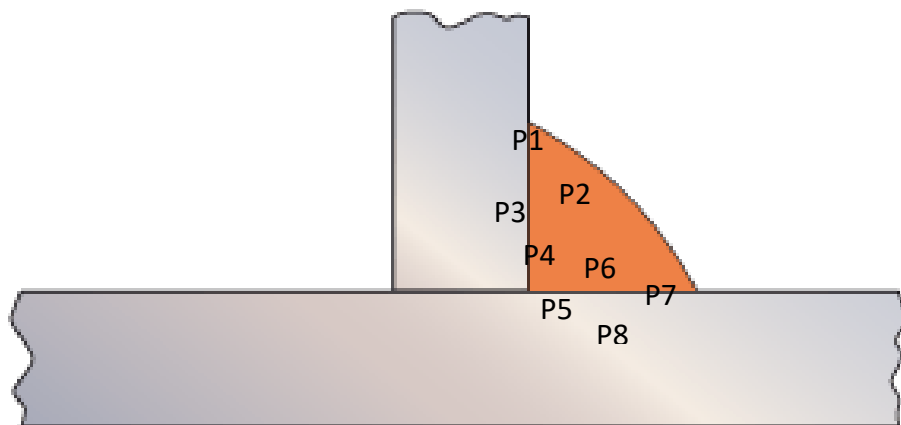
Location of points on the Fillet weld 12mm.
